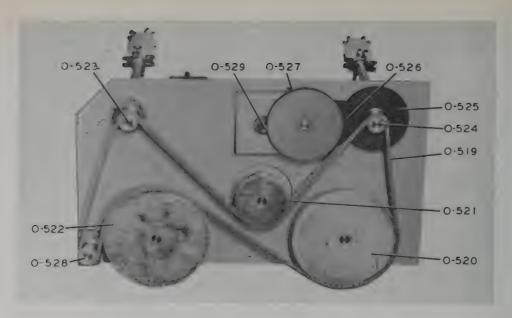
Radio Transmitter T-454/FRT-26. IPA Plate Tank Drive Assembly, Bottom View.
